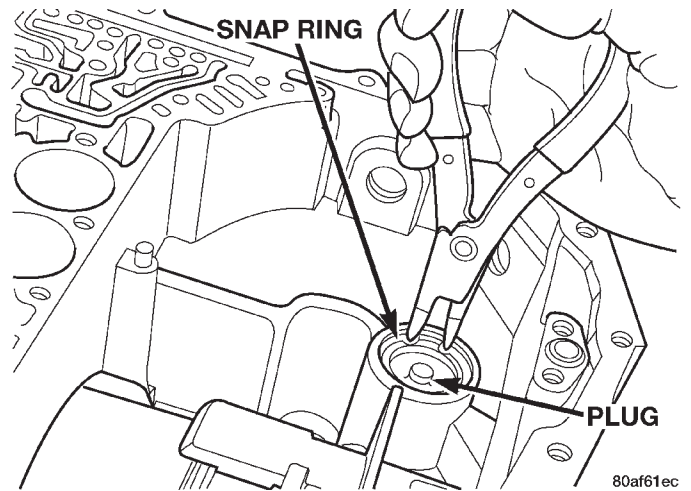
Install Low/Reverse Accumulator Snap Ring
